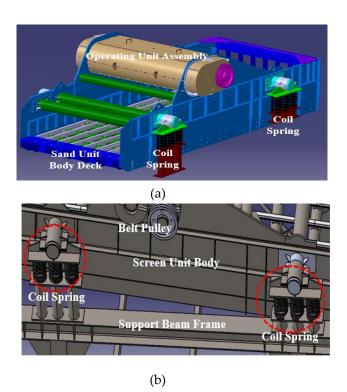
Sand unit assembly and coils spring installed in vibration isolation system: (a) Sand unit body and operating part assembly; (b) Side view of coil spring installed for screen and sand units
